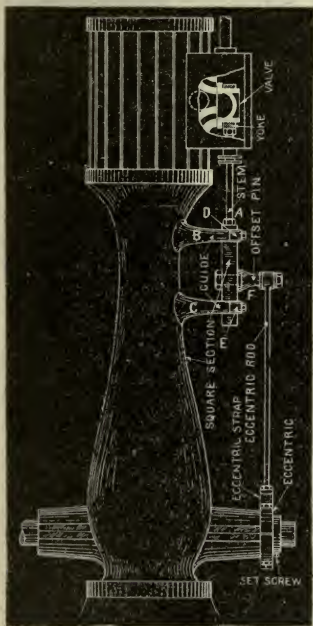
Plain slide valve engine with ordinary valve gear; a type of engine well adapted for practice in valve setting.
